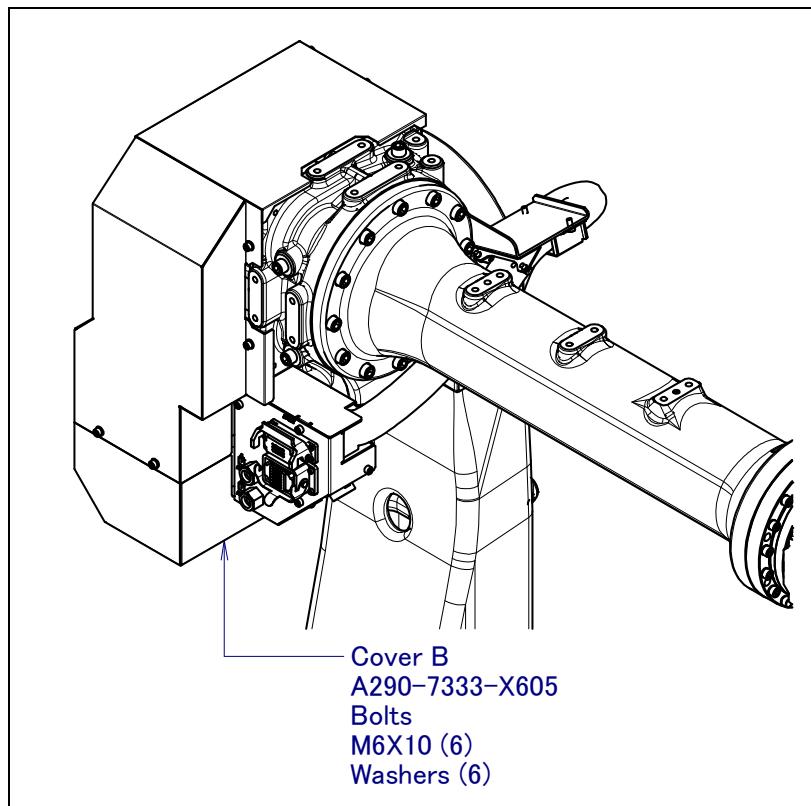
(q) Mounting the J3-axis adjustable mechanical stopper (1/3)
